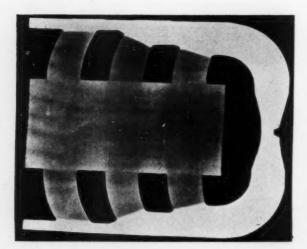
Reproduction of typical radiograph showing sound casting poured in Test No. 3.
